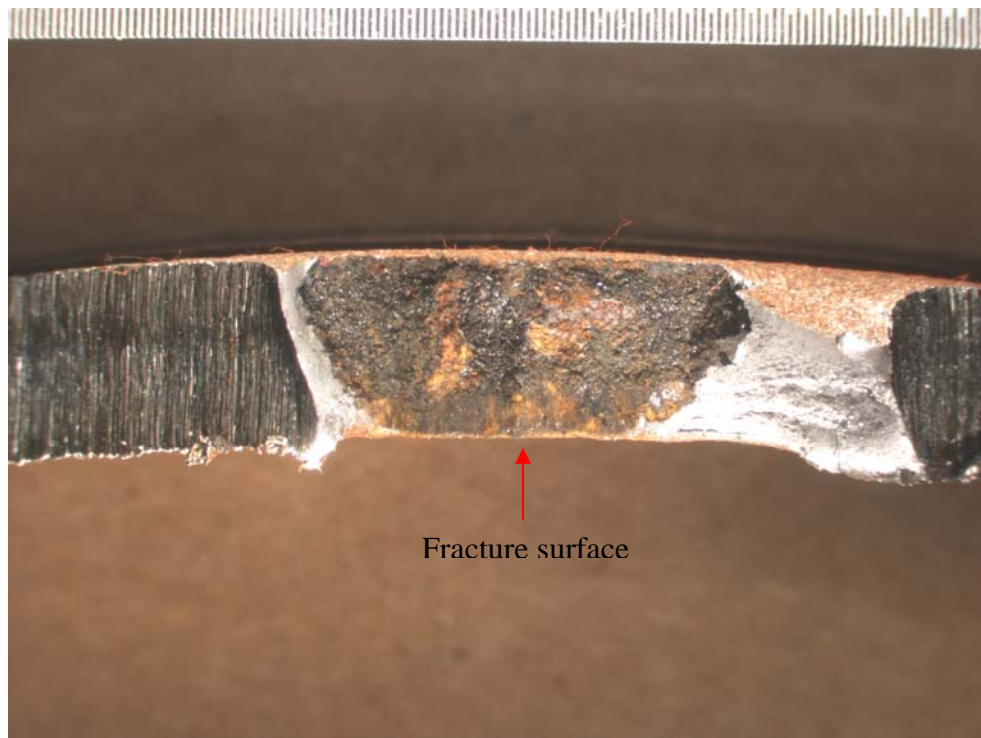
Stereoscope image of the cylinder section showing the fracture surface. Magnification 65X
